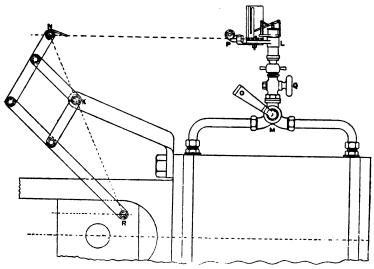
Method of Rigging up a Single Indicator on a Double-acting Cylinder.
